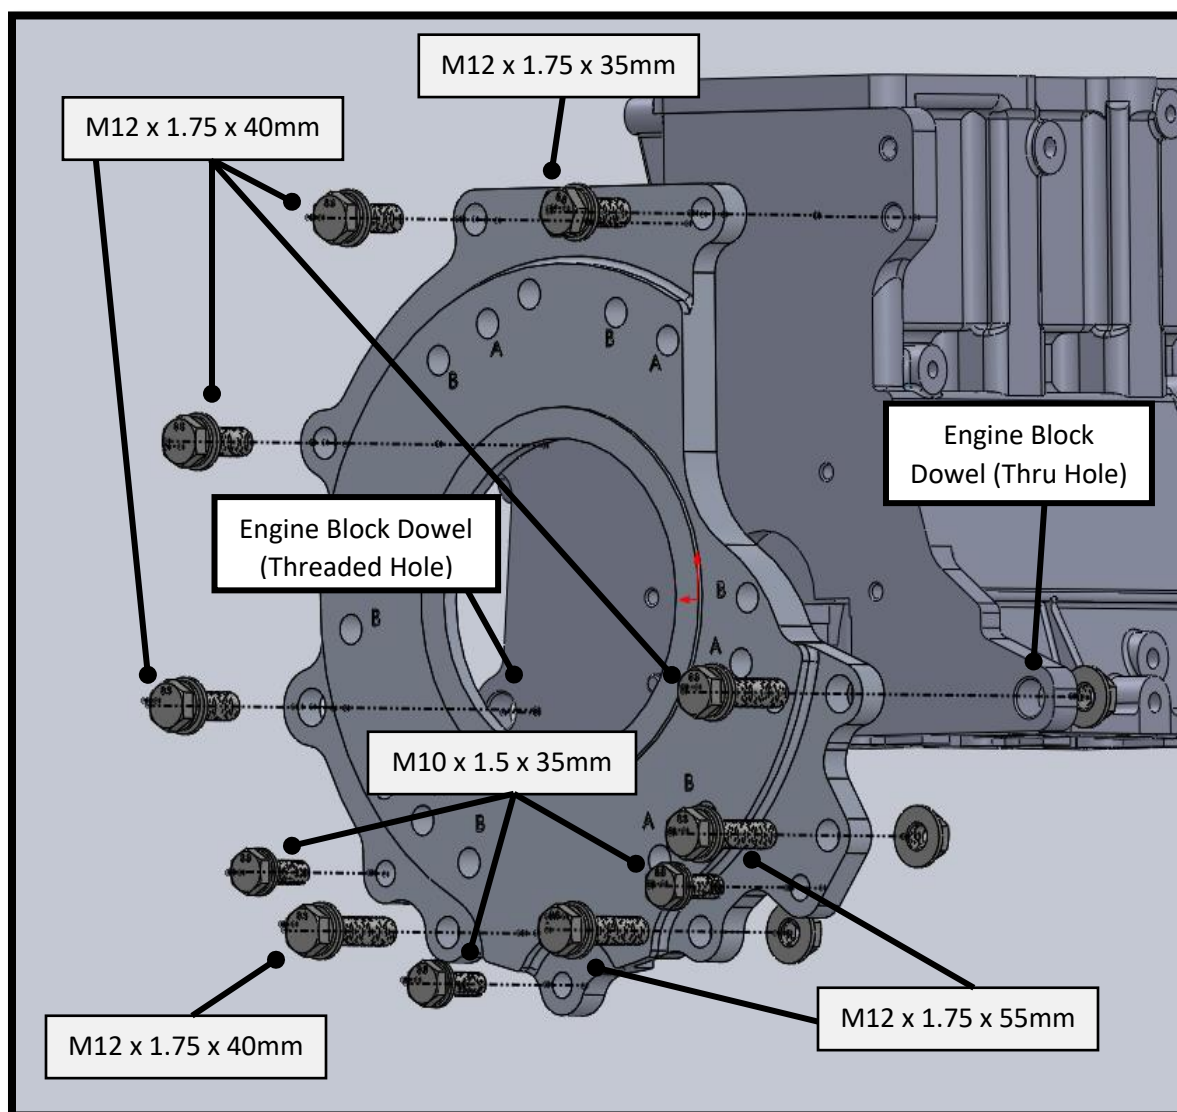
Locations of bolts to fasten the engine plate to the engine.
